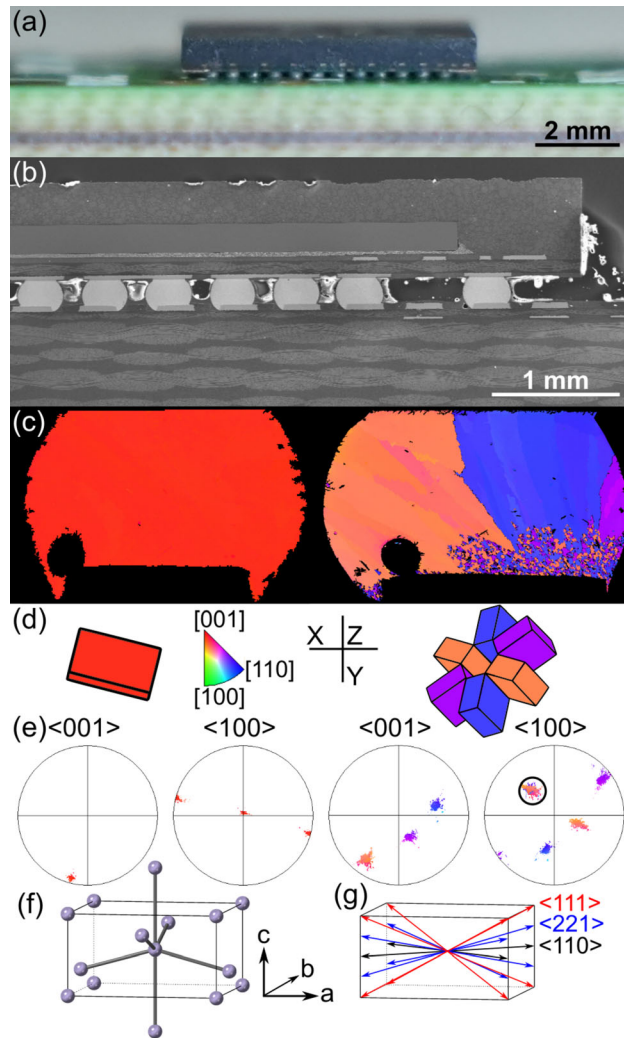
Typical BGA solder joints connecting an electronic component to a printed circuit board. (a) A photograph of a soldered 84CTBGA package. (b) SEM image of a cross section containing the solder joints. (c) through (e) EBSD analysis of joints with single-grain (left) and cyclic-twinned (right) β -Sn grain structures. (c) Orientation maps with IPF-Y coloring. (d) Unit cell wireframes of β -Sn grains. (e) $\langle 001 \rangle$ and $\langle 100 \rangle$ pole figures. The black circle indicates a $\langle 100 \rangle$ axis shared by all three orientations. (f) Unit cell of tetragonal β -Sn. (g) Wireframe showing the $\langle 110 \rangle$ (black), $\langle 221 \rangle$ (blue), and $\langle 111 \rangle$ (red) directions (Color figure online).
